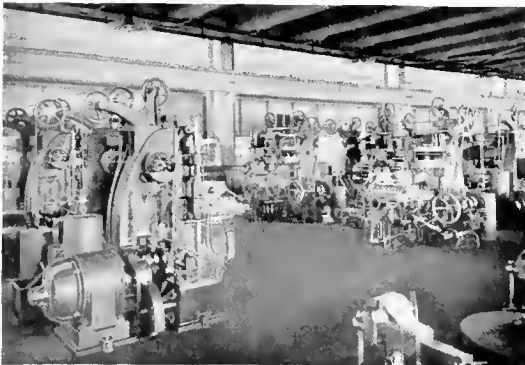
Group of Individual Motor-Driven Milling Machines each driven by a 10 h.p. motor. Note head-room clearance for cranes
